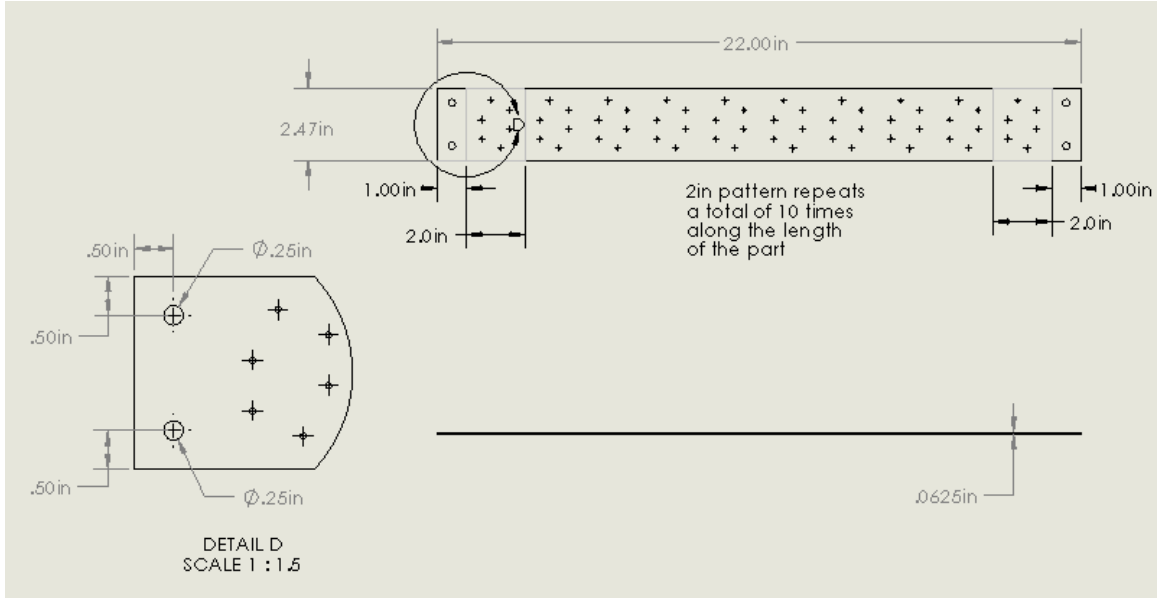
GFIT perforated aluminum face sheet CAD drawing.
